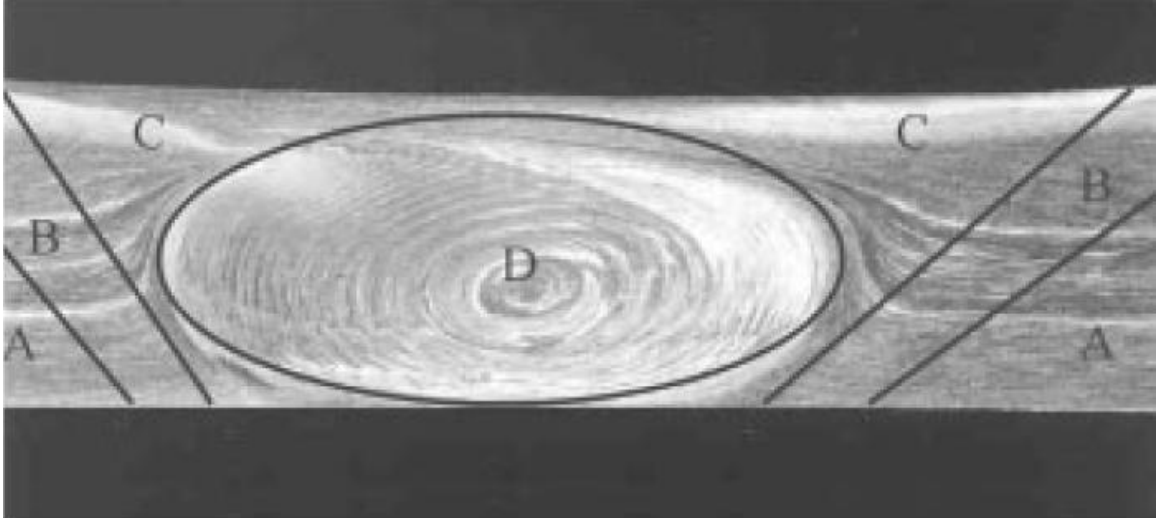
Friction stir weld regions [Threadgill, 2007]
